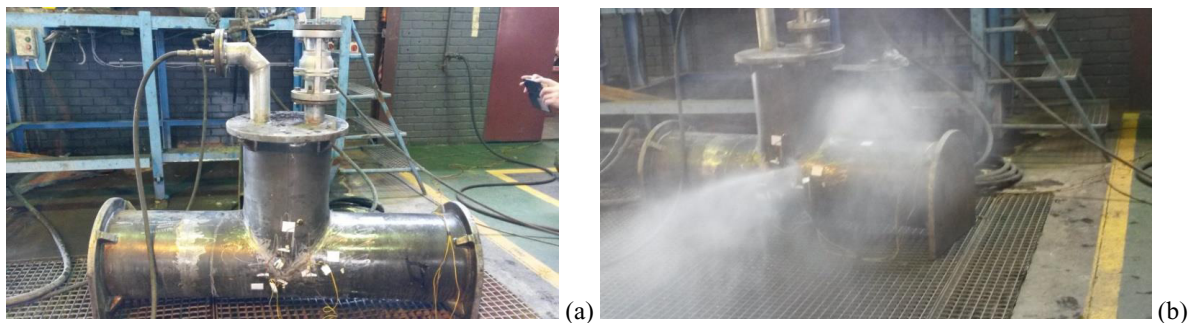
(a) Water filling and air release installation and (b) Pipe failure
